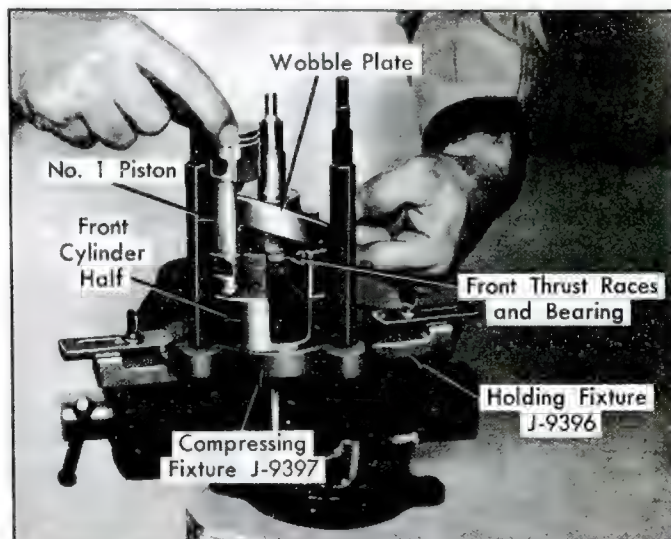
Installing Piston, Front Ball and Seat and Rear Ball
